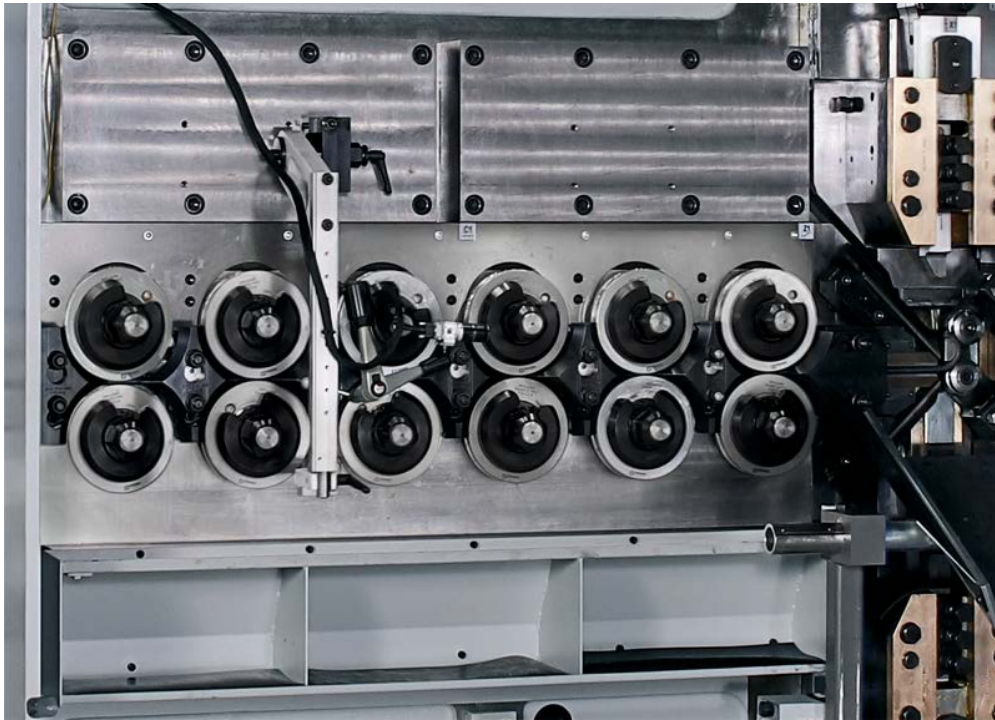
The FUL 166 is the first spring coiling machine from WAFIOS with six pairs of feed rollers. Far right: cutting device and PTP coiling finger.
